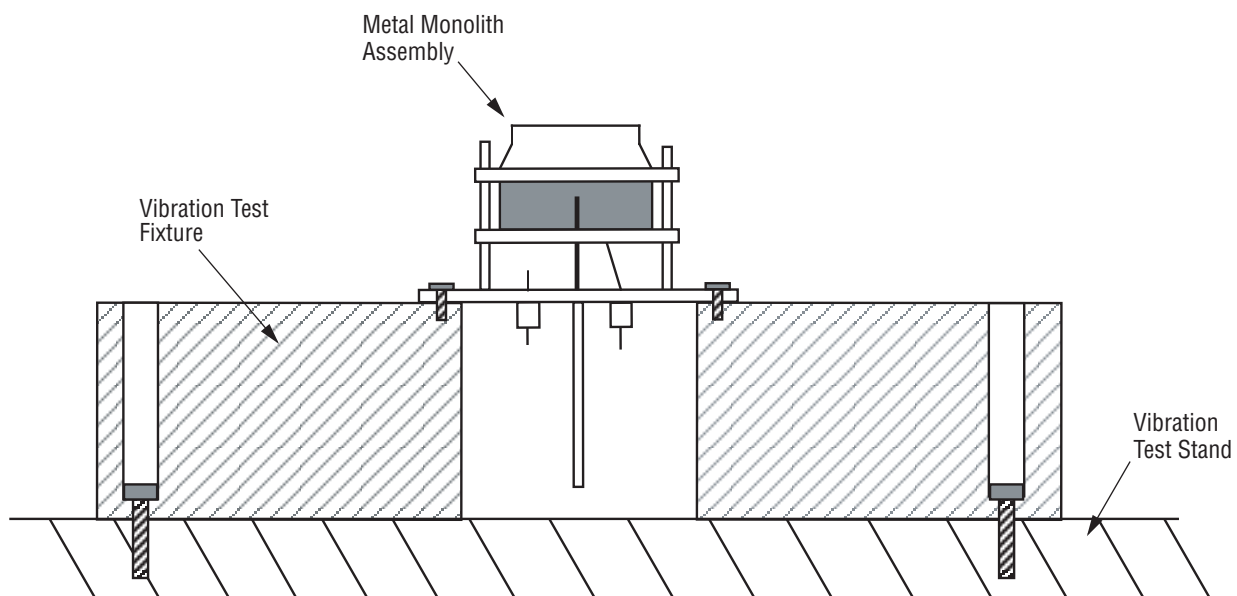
Cross-sectional view of the metal monolith assembly mounted on the vibration test fixture.
